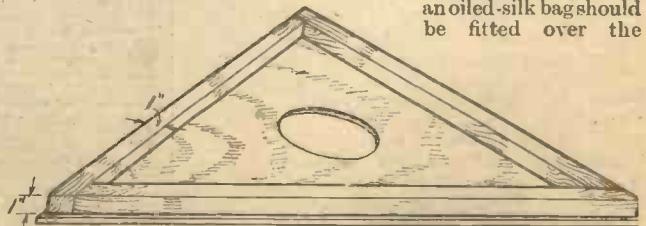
Method of fitting the 1in. square pieces to the top and bottom.
